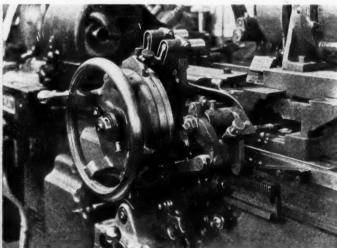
Heald Sizematic Grinder showing cam and lugs which operate magnetic circuits for sizing and wheel dressing
